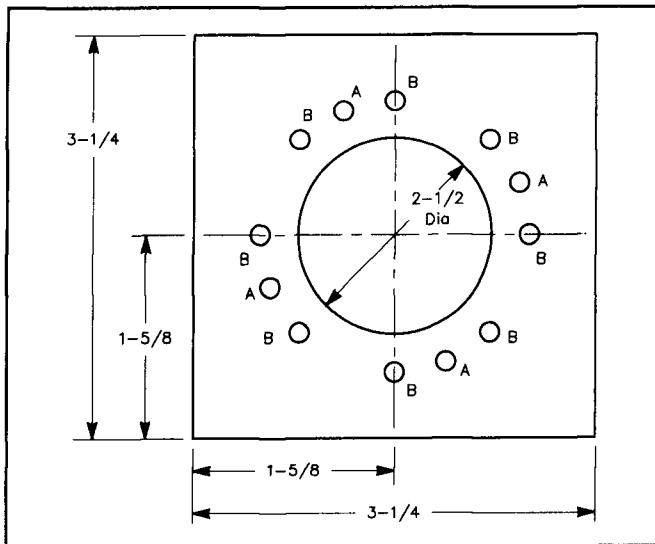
Air outlet retaining plate is made of 1/4-5/16 in. aluminum. Hard alloys, such as 6061-T6 or 2024-T6 are preferred. Holes marked A are No. 27. Locate the 4 holes equally spaced on a 2-7/8 in. diam. circle. Holes marked B are No. 35, tapped 6-32. Locate the holes equally spaced on a 3-in. diam. circle.
